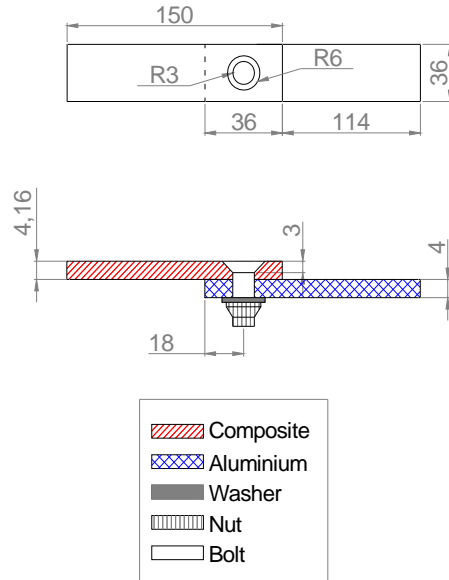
Specimen with countersunk hole (measures in mm; drawing not scaled).
